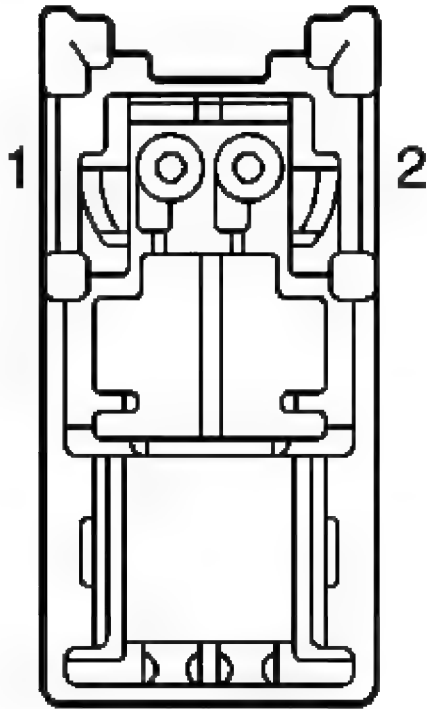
Seat Belt Pretensioner Connector End View - RF
